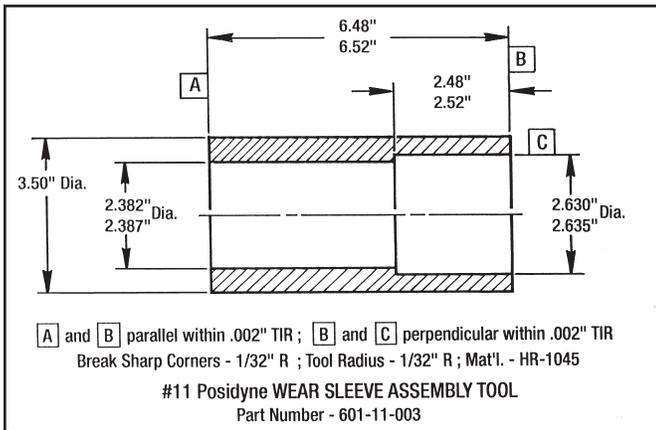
Wear Sleeve Assembly Tool for #11 Posidyne
